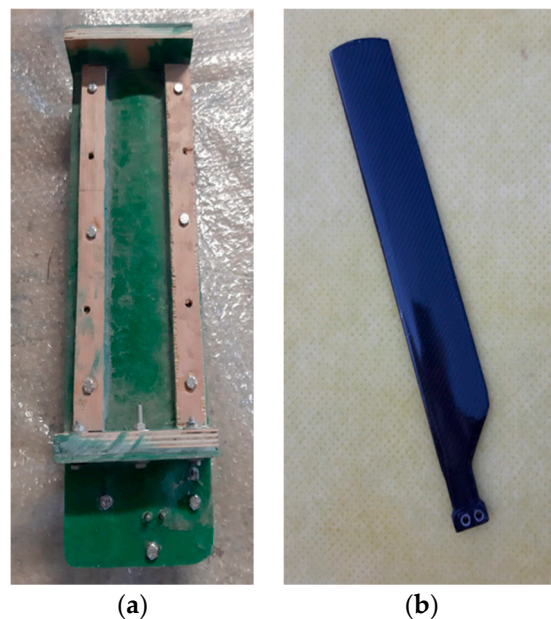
Final stages of the manufacturing process: (a) the manufacturing moulds locked into place, (b) final composite blade after surface finish was applied.
